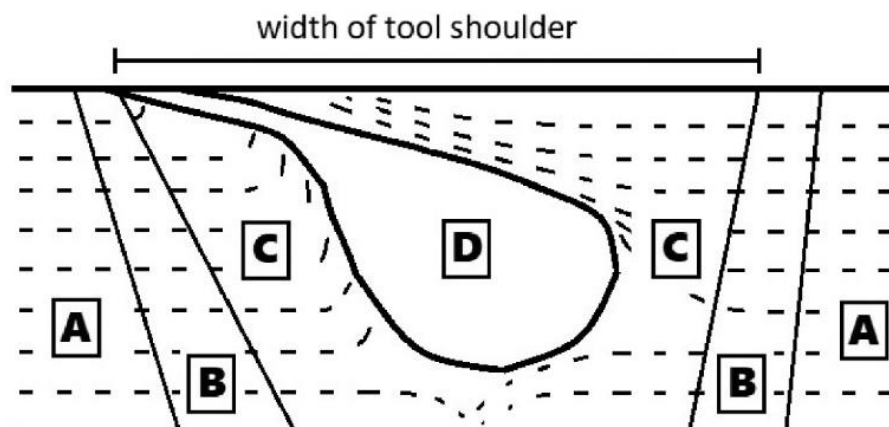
Schematic cross-section of a typical FSW weld including four distinct zones: A – base material, B – heat-affected zone, C – thermo-mechanically affected zone, D – stirred zone (nugget)
